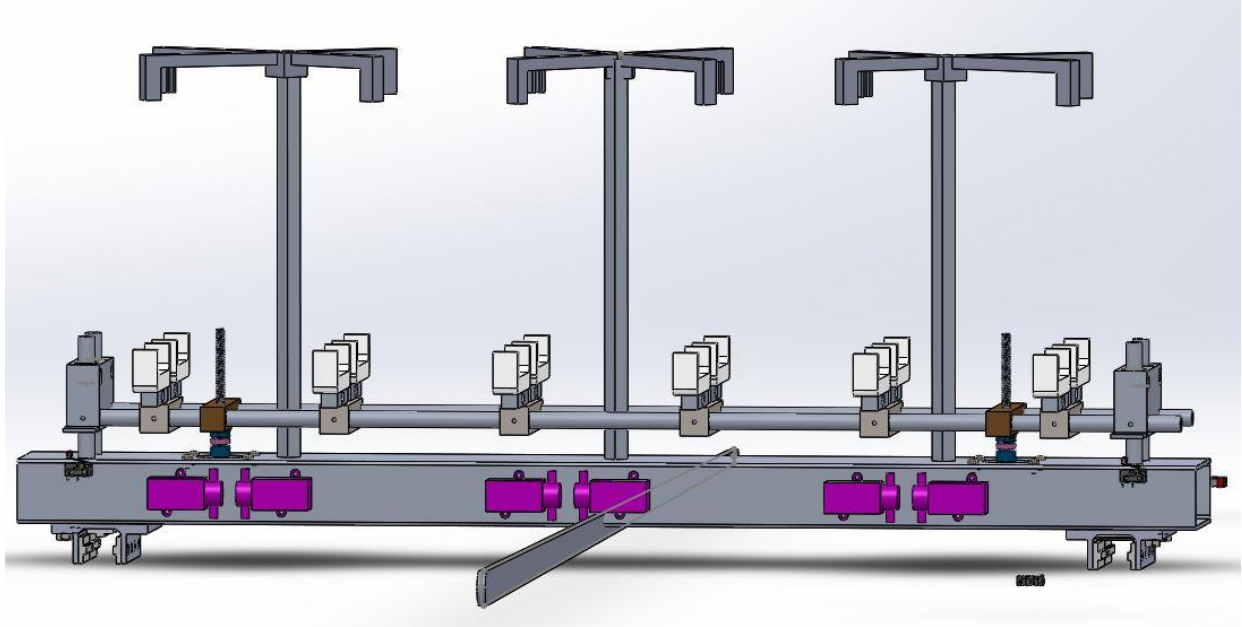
Solid Model of the Carrier – Square Tube, Lifting Mechanism (Vertical Linear Guides and Actuators), Cup Holders, Water Tube Fixers.
